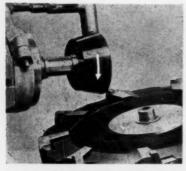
(bottom left) Grinding the Side Face Fig. 23. (bottom right) Grinding the Chamfer
